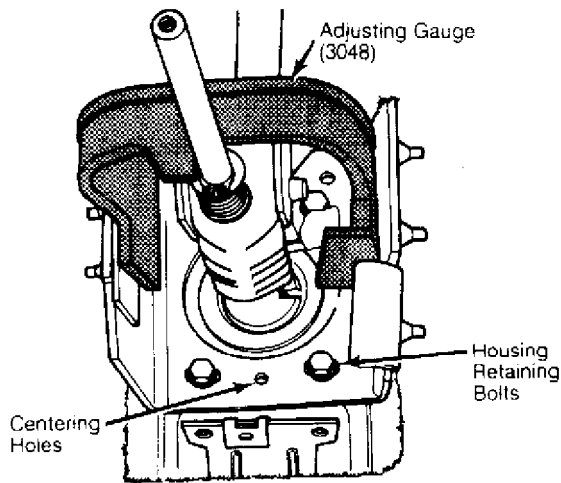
Adjusting Quantum Syncro Gearshift Linkage
